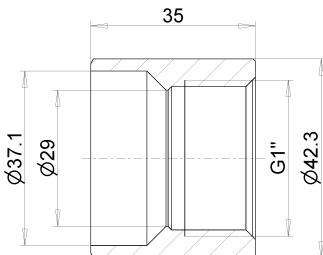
Dimensions weld-in adapter G 1"
